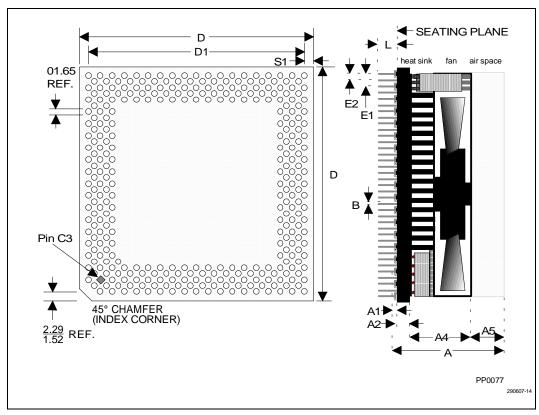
Pentium® OverDrive® Processor with MMX™ Technology Package Dimensions
